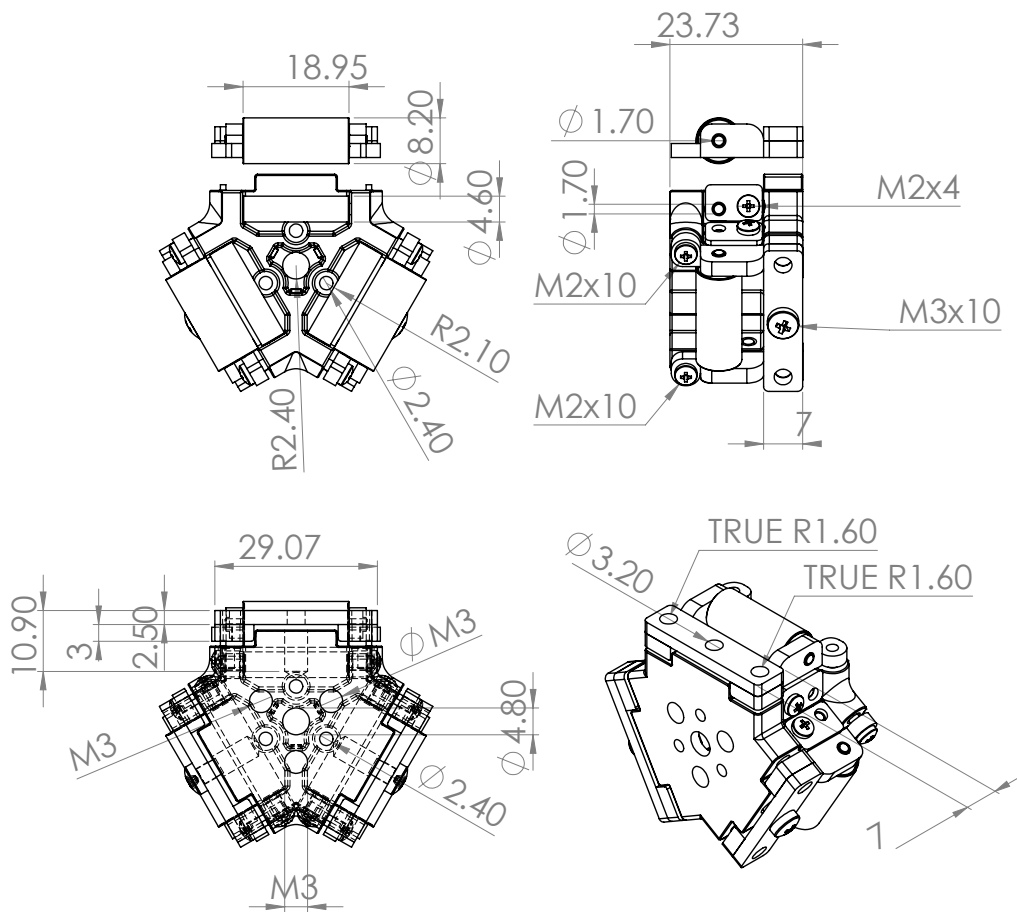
Dimensions of the end-effector (mm). Final prototype.
